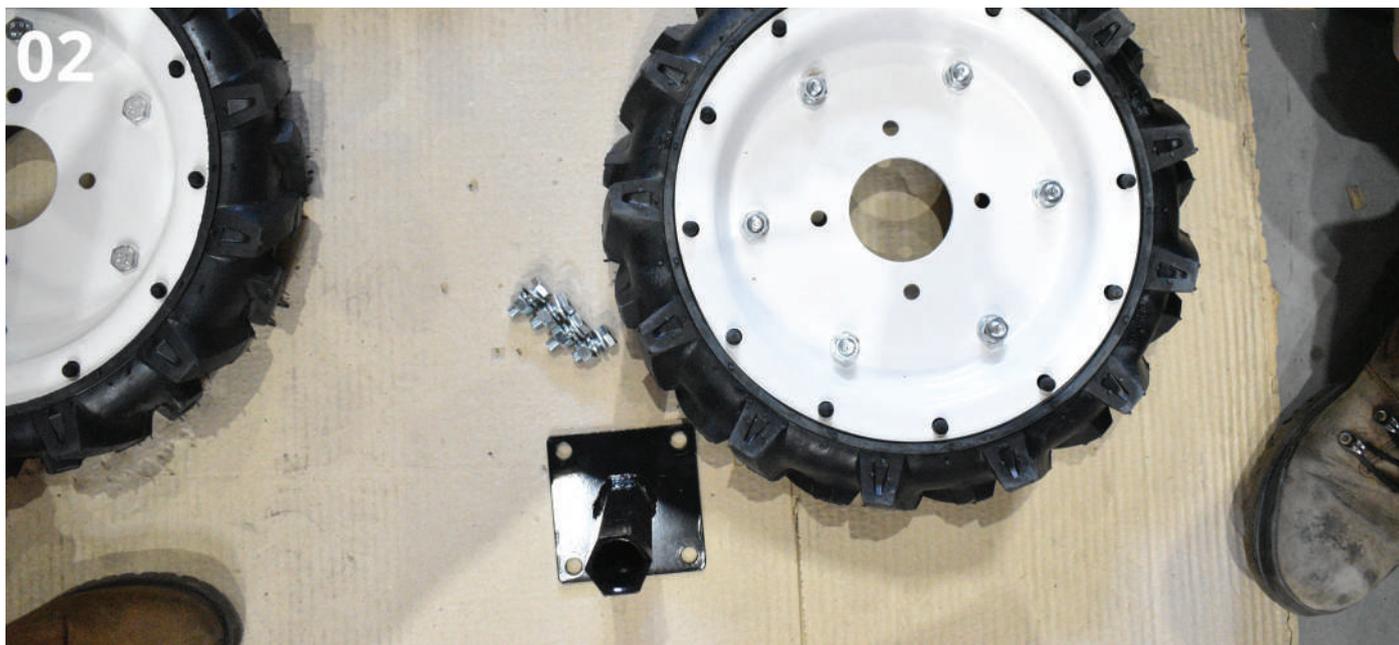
Secure the transport wheel to the axle using a bolt, nut and washer.
